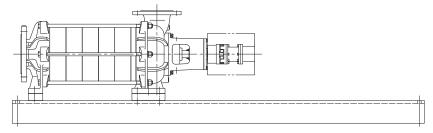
Expansion stage G, pump with coupling, mounted on base plate, with coupling guard
